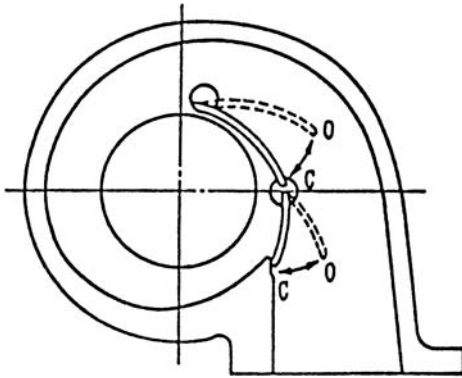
Two vanes are used to provide a form of variable inlet turbine. (Courtesy Mitsubishi Heavy Industries America, Inc.)
